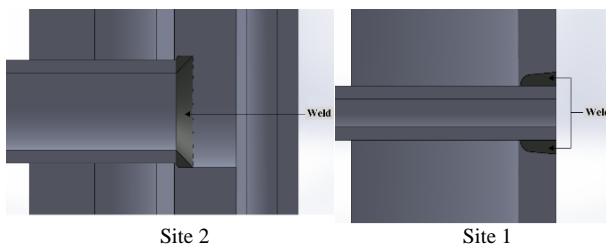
Tube-to-tubesheet weldment of sites 1 and 2
